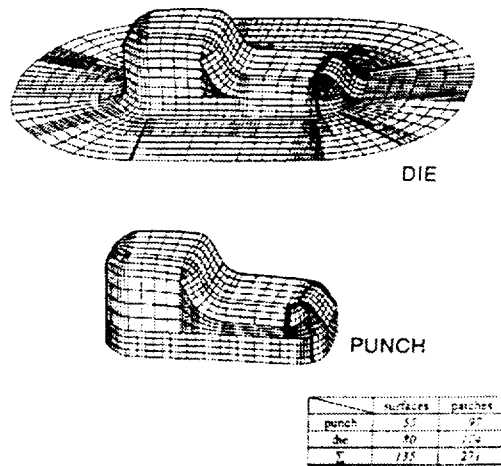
Schematic view of the parametric tool surfaces for oilpan deep drawing.
